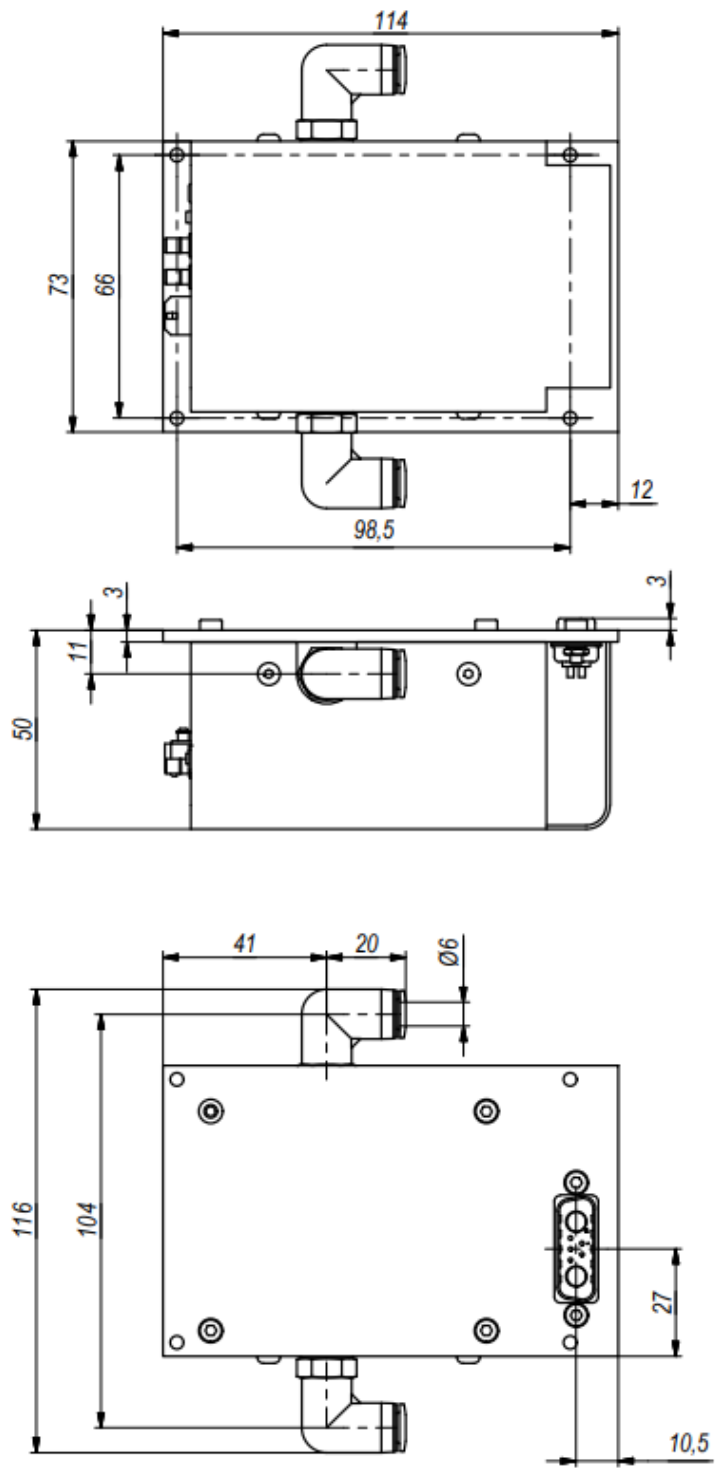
Outline drawing and dimensions of the driver DP-50-3.6
